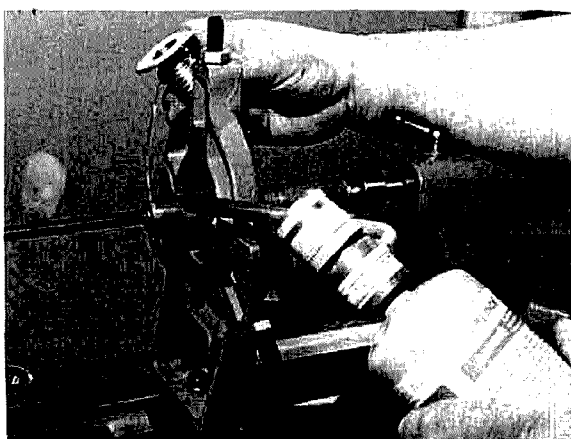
This is how the threaded brass plug is silver soldered to the brass tube and threaded rod while turning in the lathe. Note how the aluminum plug described in fig. 5A is used to support the other end of the brass tube in the tail stock live center rest.
